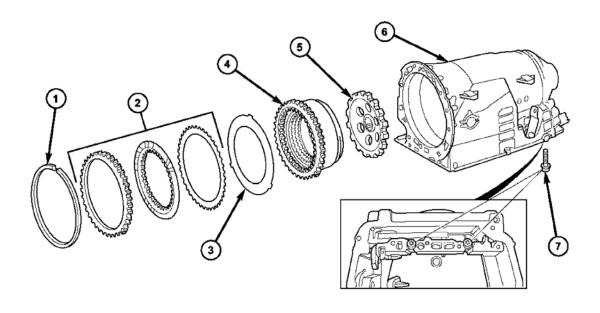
Removing/Installing Holding Clutch B1 and Oil Pump Courtesy of CHRYSLER LLC
